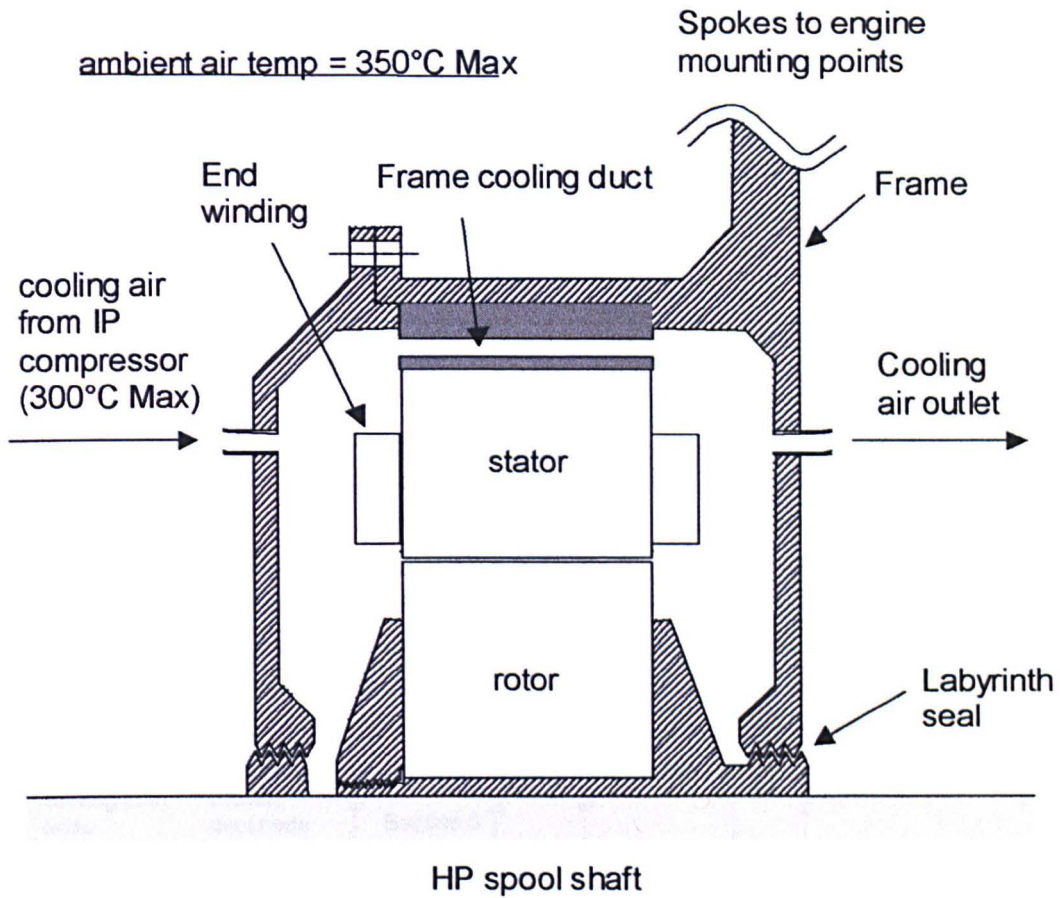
Axial cross-sectional view of potential air-cooling for HP machine.
